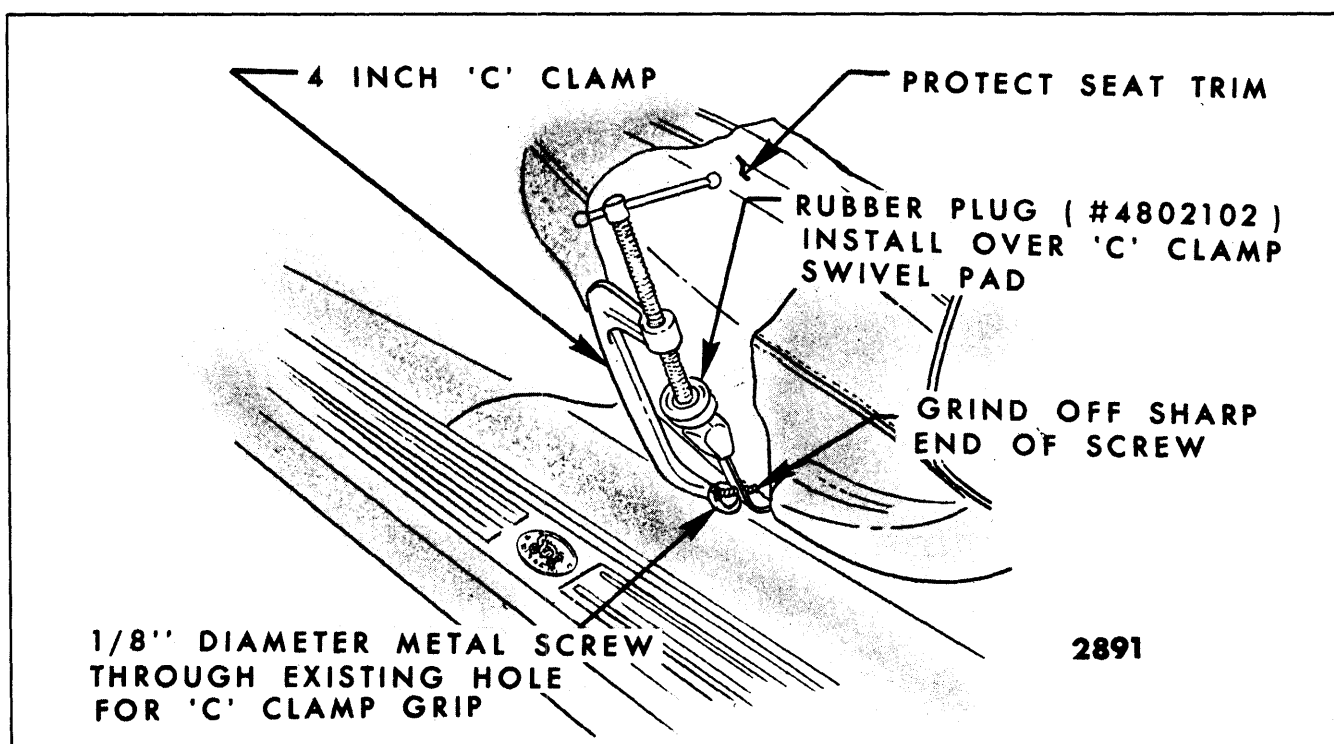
Front Seat Adjuster Control Knob - Installation
